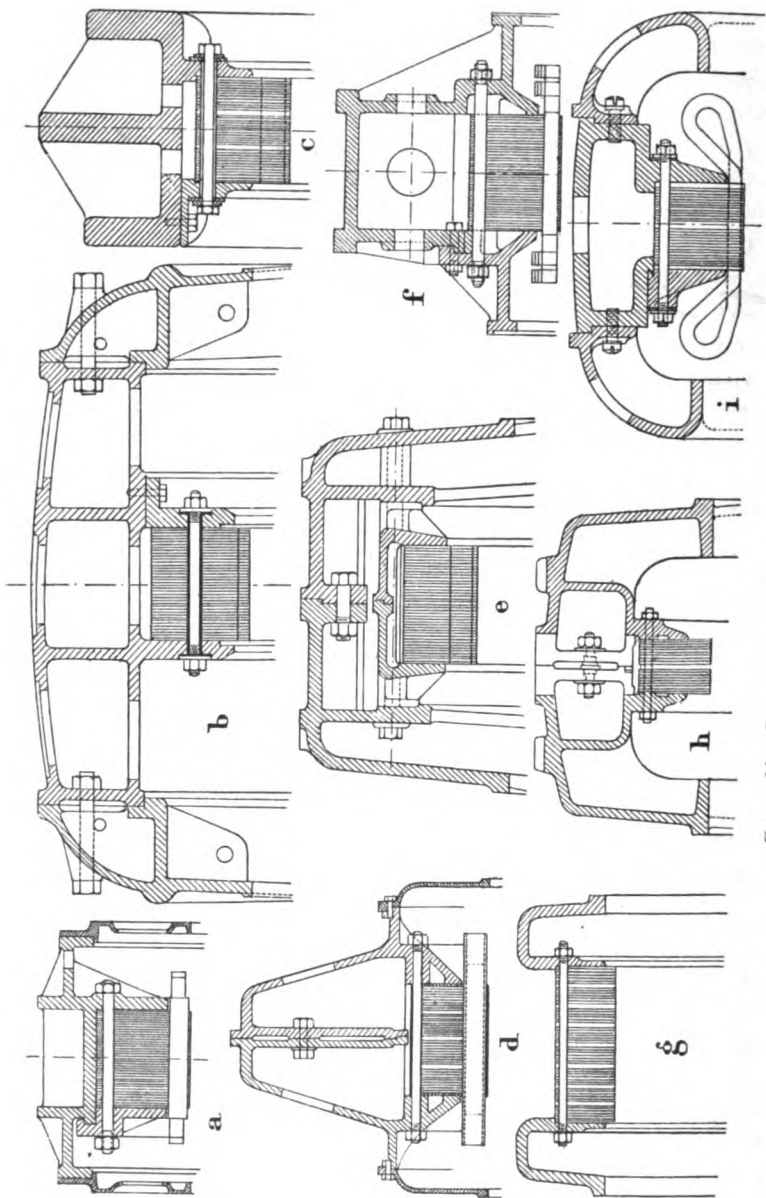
SECTIONS OF ARMATURE HOUSINGS.
